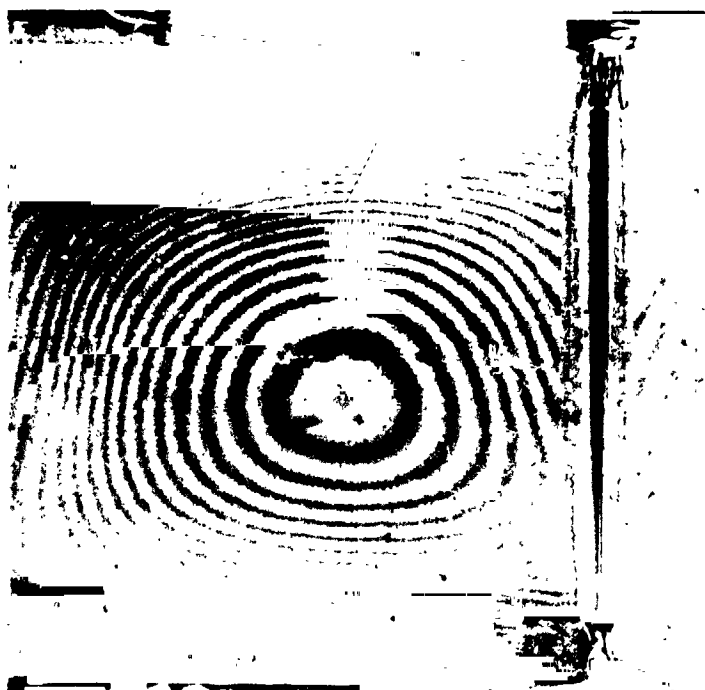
Honeycomb Panel Compression Test—Load = 39.9 kN
